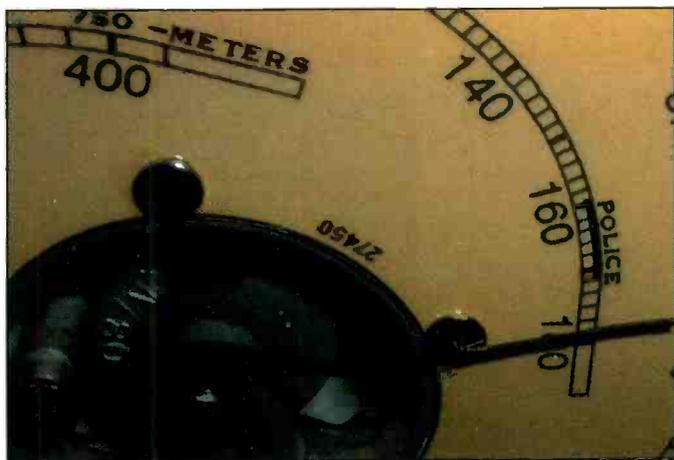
Photo D. This photo shows the tight clearances between the rivet heads holding the main dial scale to the aluminum hub and dial pointer. Screw heads will not provide the needed clearance.
